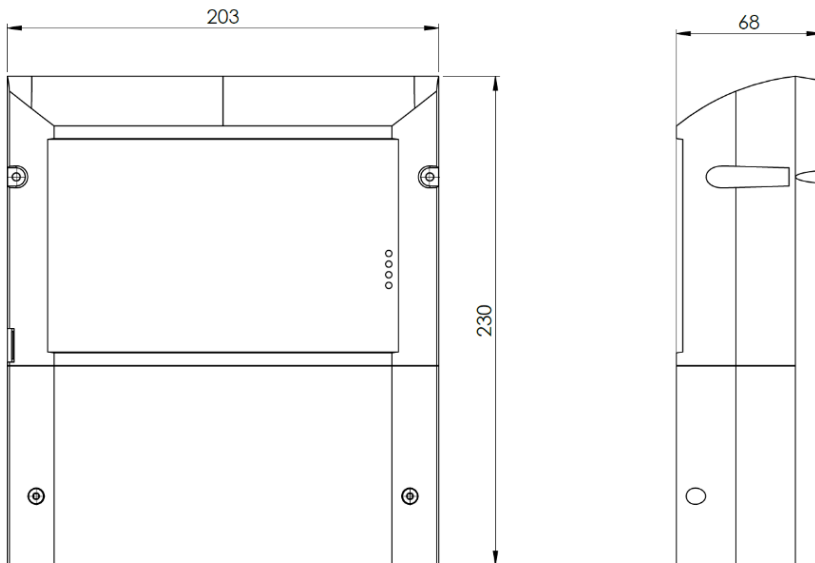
Dimensions of the BWC 330 Pro controller [mm]
